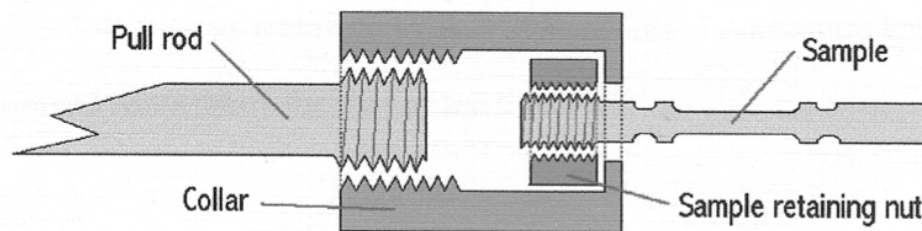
Schematic drawing demonstrating cross-sectional view (along longitudinal orientation) of specimen-holding assembly [15].
